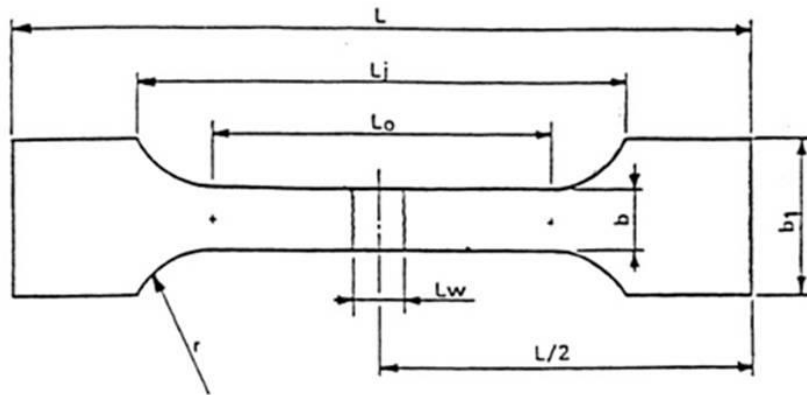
Typical geometry of dumb-bell tensile test specimen, as defined in EN 12814-2
